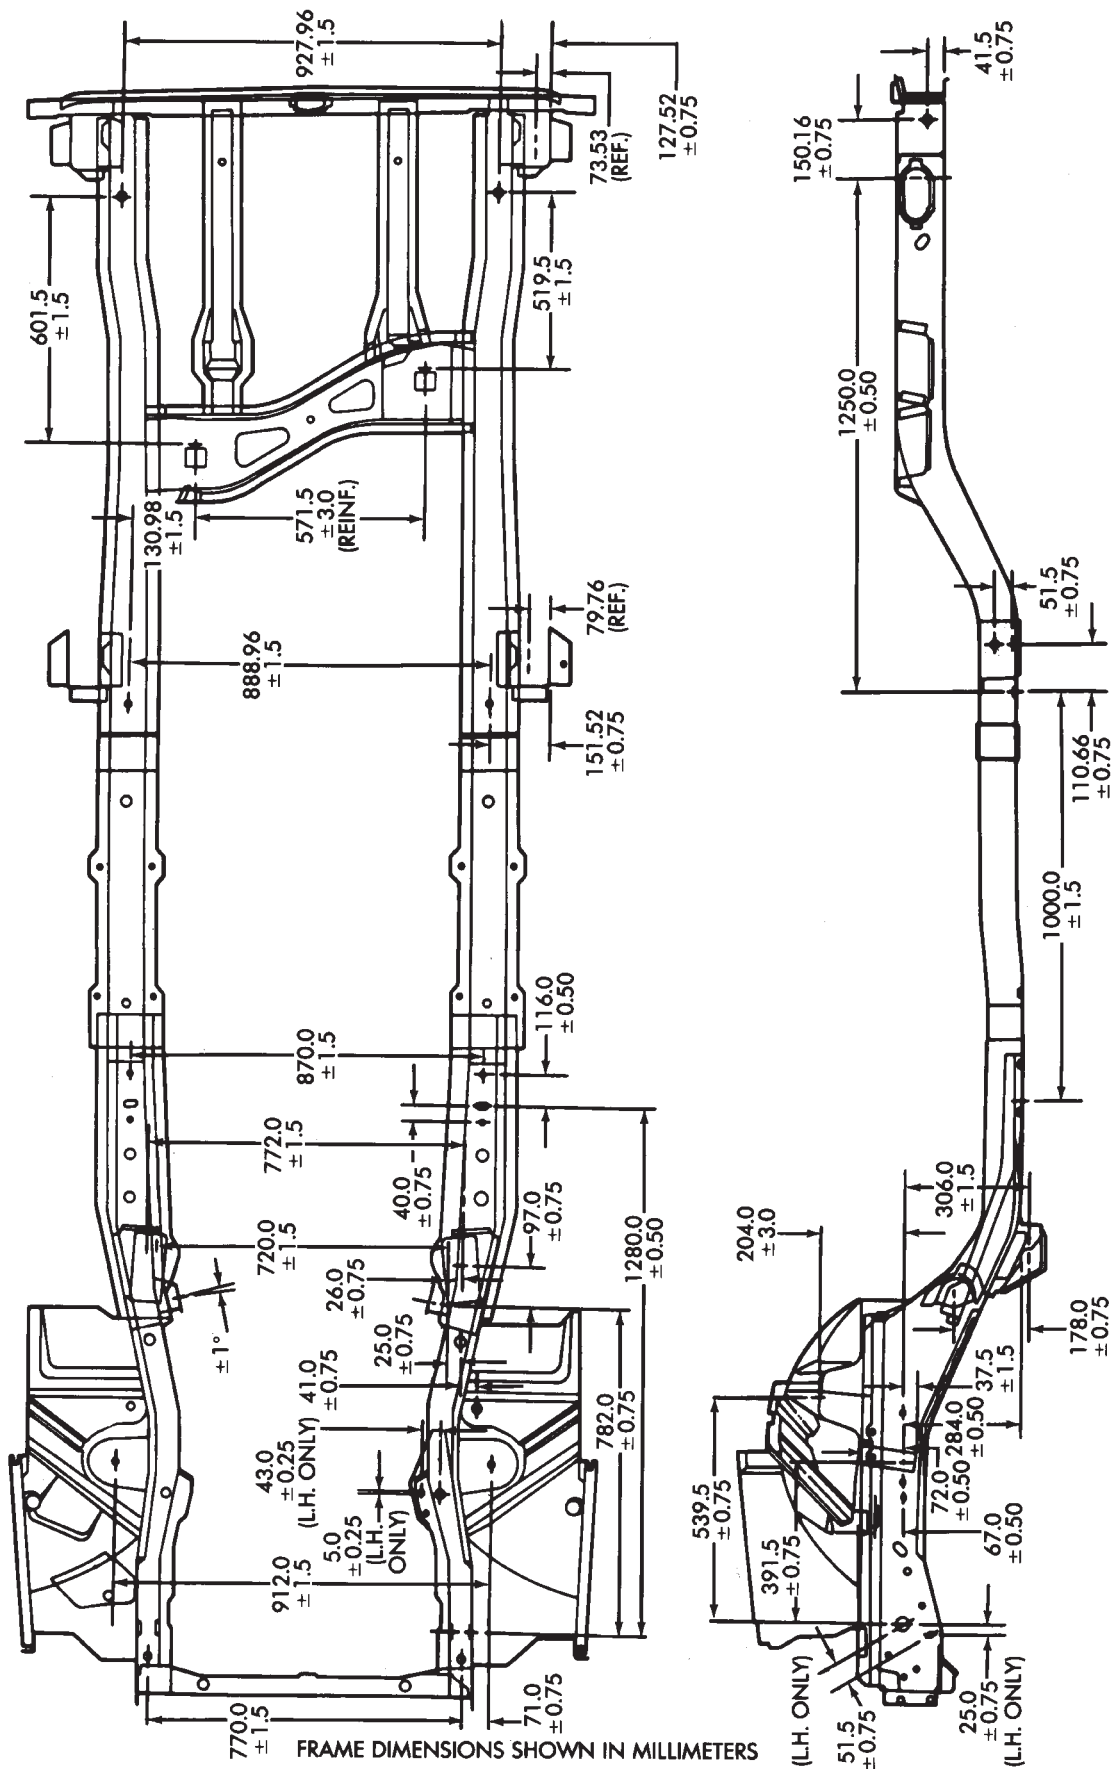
Frame Alignment Reference Dimensions—XJ Vehicles
